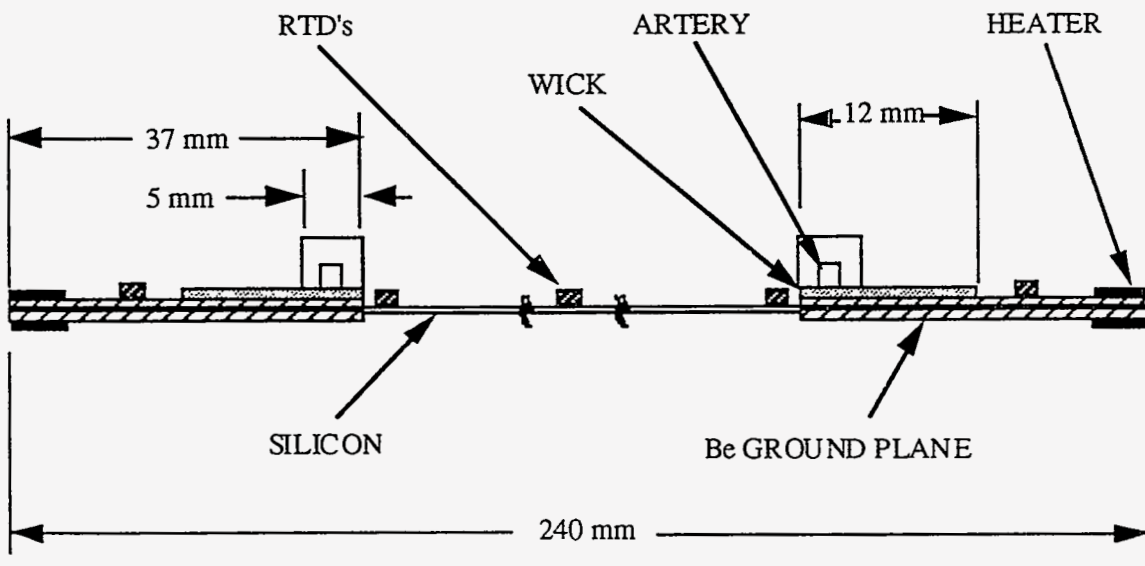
Cross-sectional view of a typical silicon ladder assembly.
